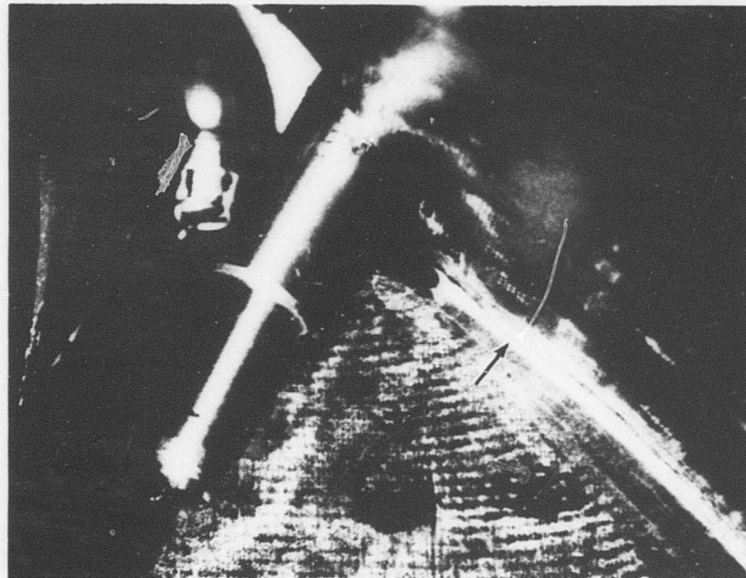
Crack in the Input Pinion Roller Bearing Web-Housing Bond After Failure, Left Side.
